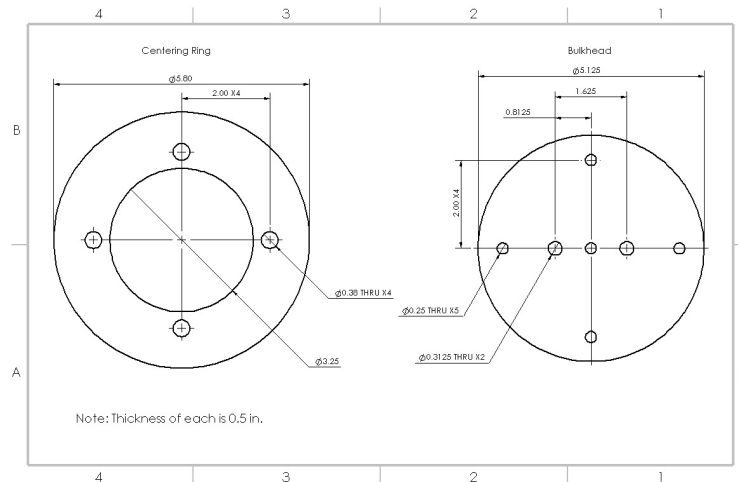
Dimensioned drawing of the nose cone bulkhead and centering ring.
